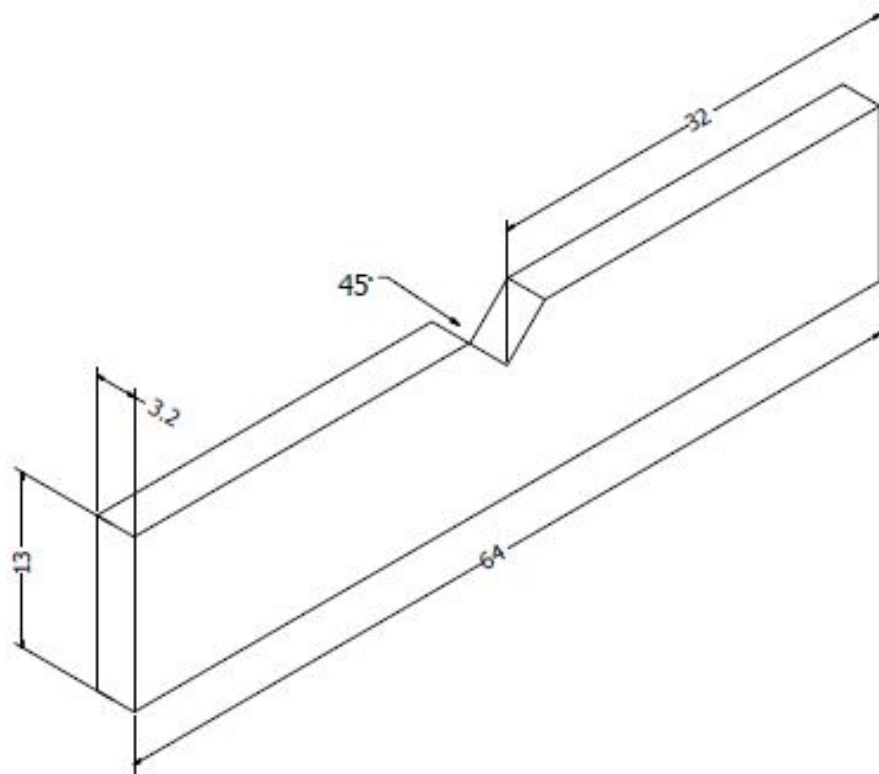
Impact testing specimen dimensions as per ASTM standard.
